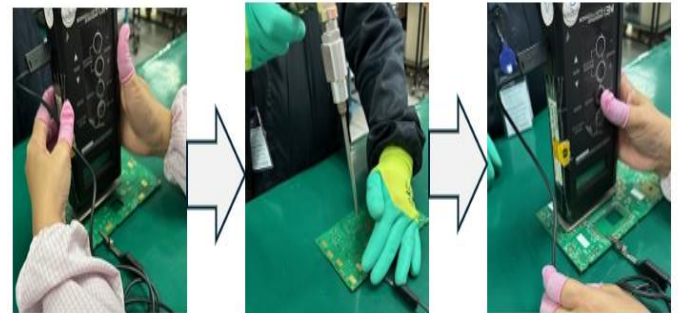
Stages of Ion Balance Measurement on the PCB Surface
